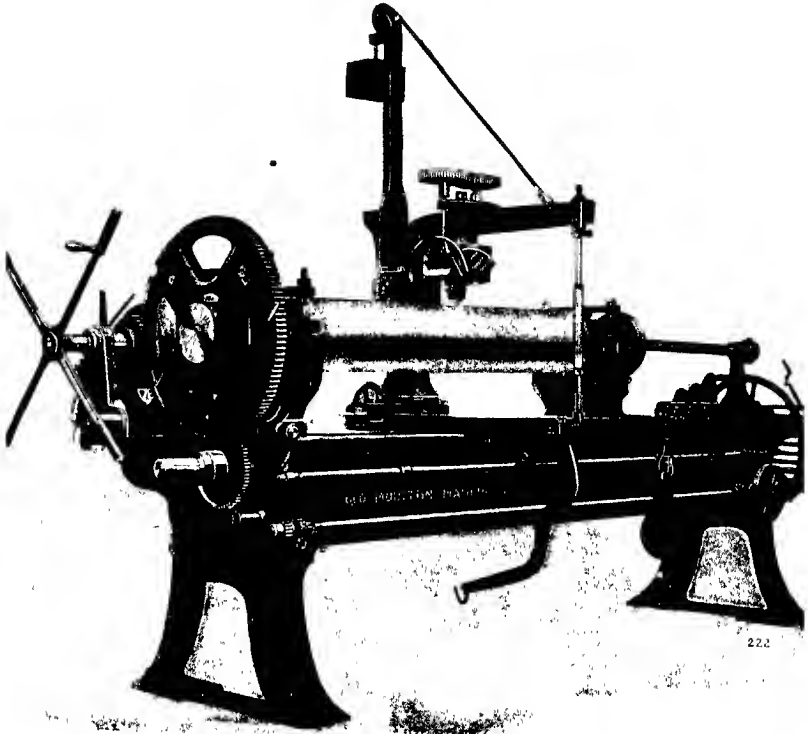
Mill Engraving Machine for Steel Cylinders.
